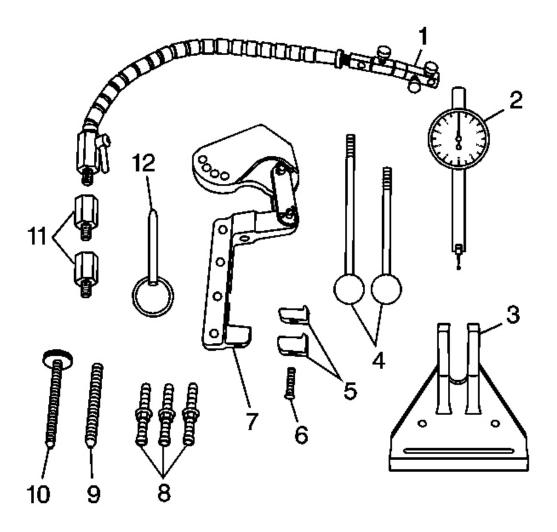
Identifying Rod Bearing Clearance Checking Tool
